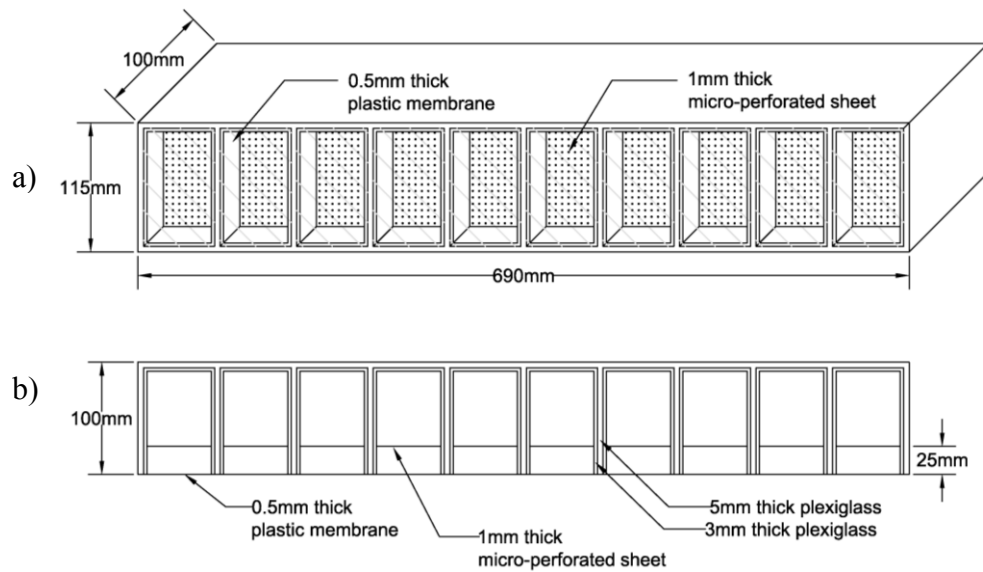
Dimensions of the divided Plexiglas panel with one membrane layer and one layer of micro-perforated sheet; (a) isometric view, (b) top view.
